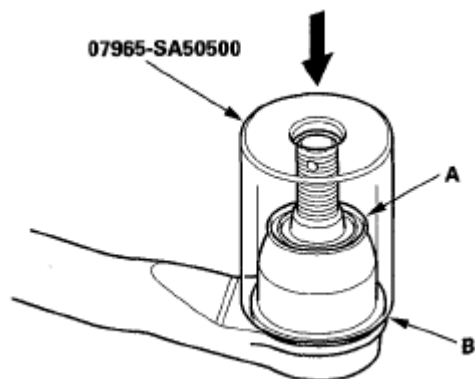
Identifying Tie-Rod Ball Joint Boot
